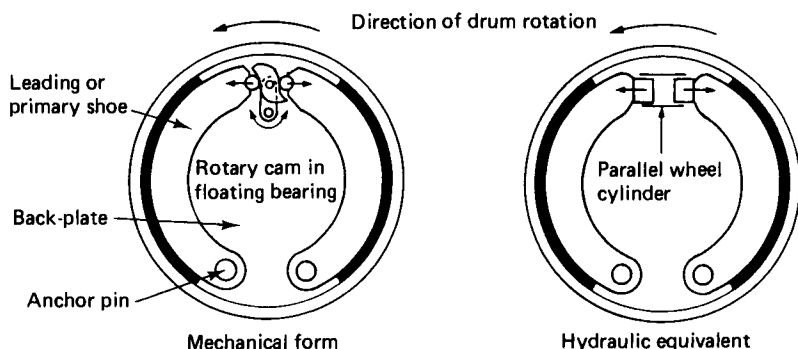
Floating cam drum brake in mechanical and hydraulic forms. Shoe-to-shoe springs are omitted for clarity
